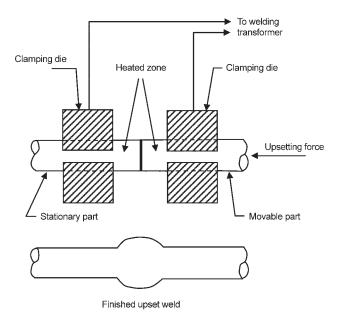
General arrangement for upset welding of bars, rods, and pipes. Source: Ref 3.5, p 598
